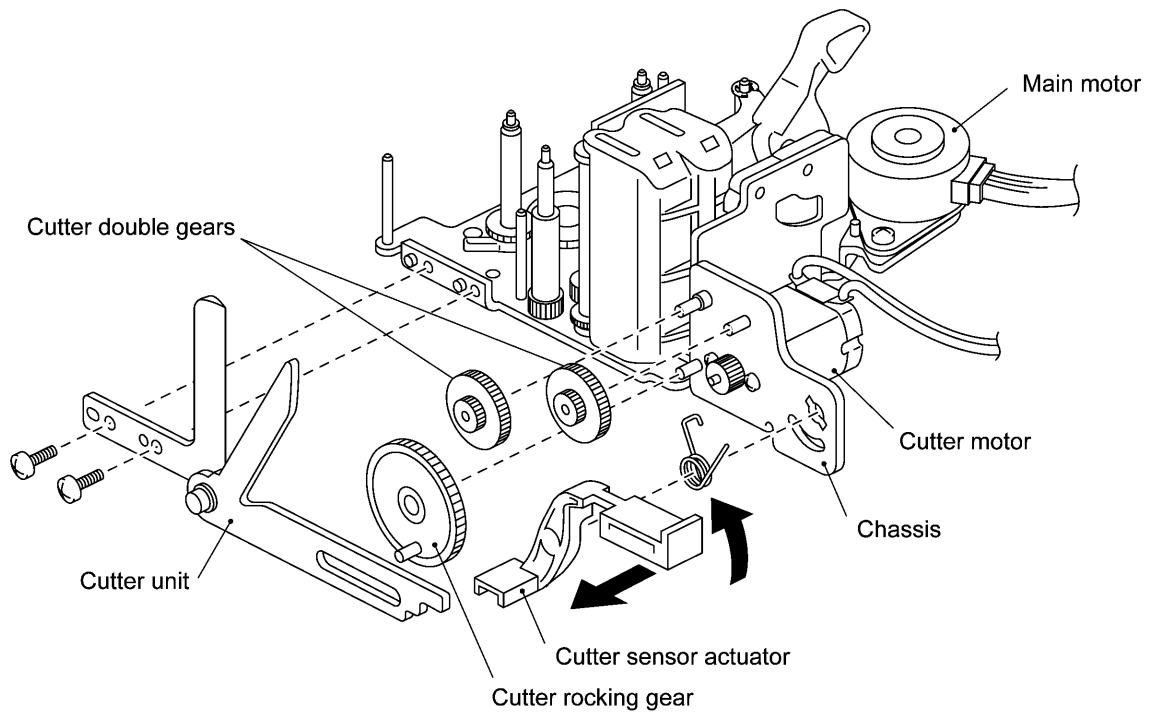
Removing the Cutter Unit and its Related Parts
